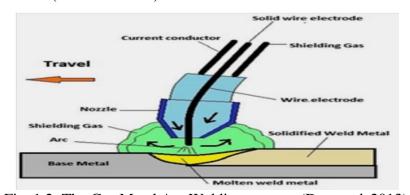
The Gas Metal Arc Welding process (Das et al. 2013)
